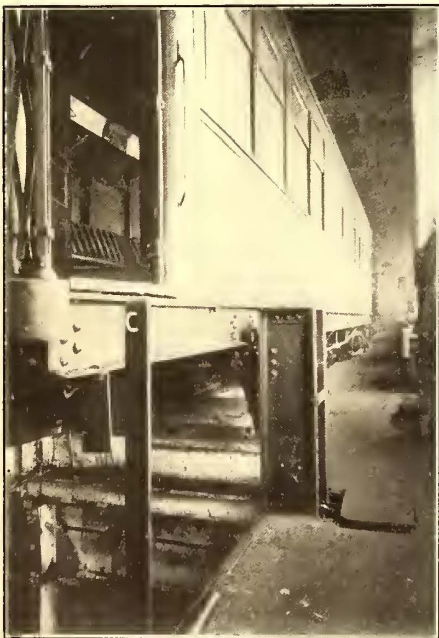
CAR OVER ELEVATOR, SHOWING POST AND DOG FOR SUPPORTING CAR BODY
